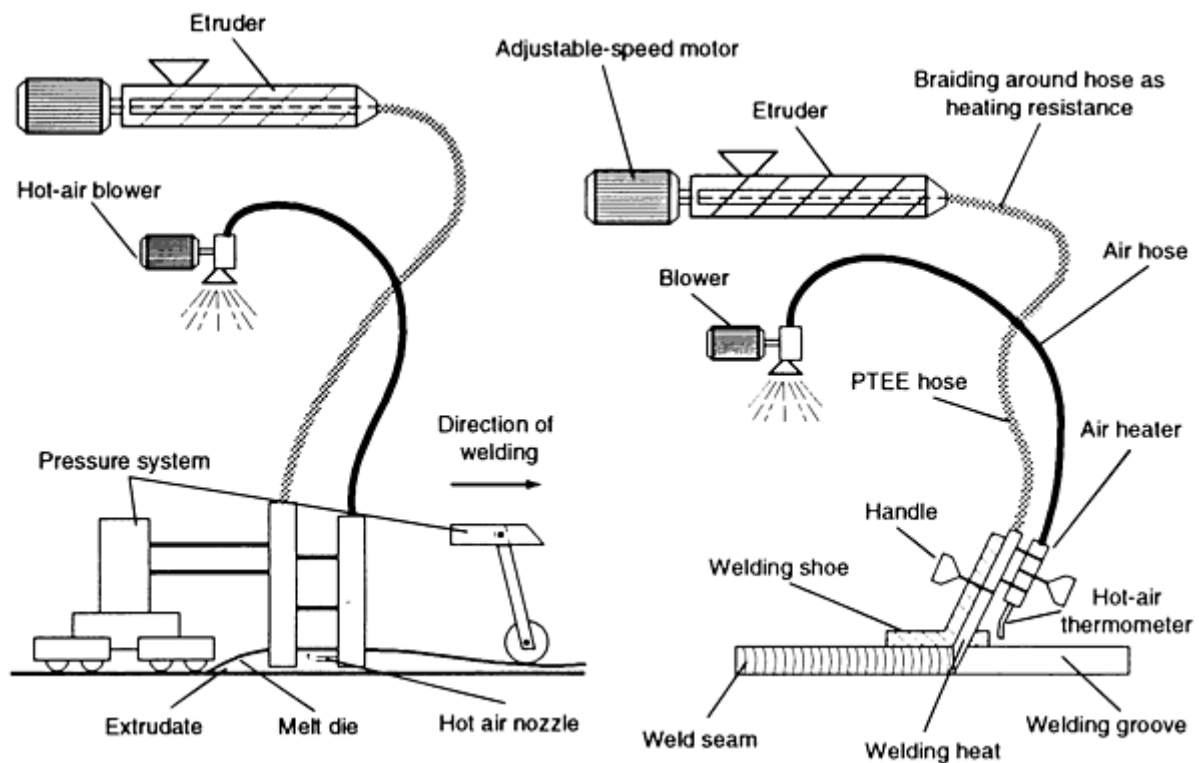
SCHEMATIC OF VARIANTS OF EXTRUSION WELDING PROCESS. SOURCE: REF 20
